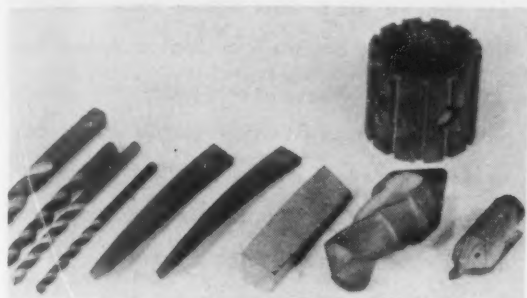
Group of fluted blanks formed in powder stage. Special machines are designed for this type of work.
